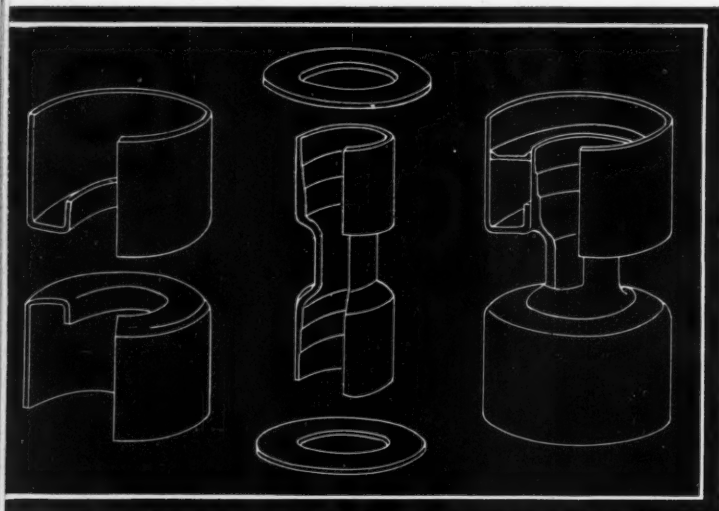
Above—Stampings for this welded roller on a half-track required 25 pounds of steel compared with 42 pounds for the steel casting which they replace
